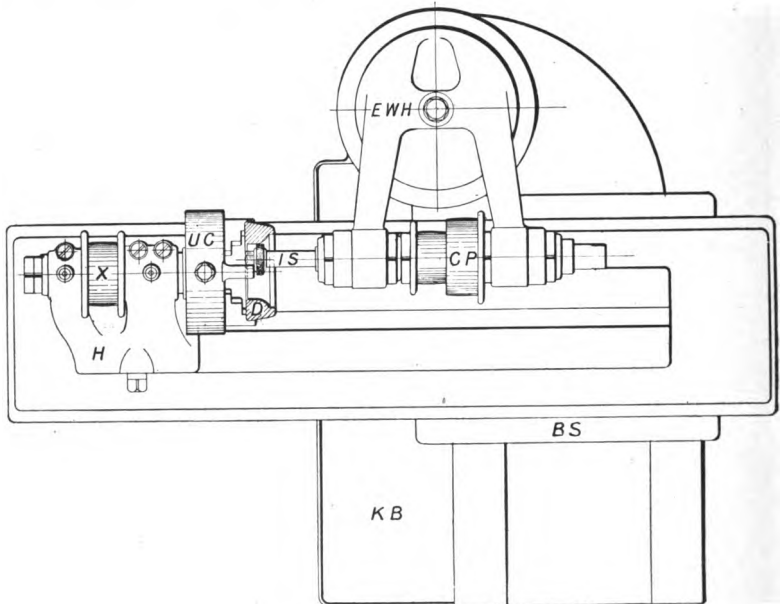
"Ward" Machine grinding Press Drawing Die.
